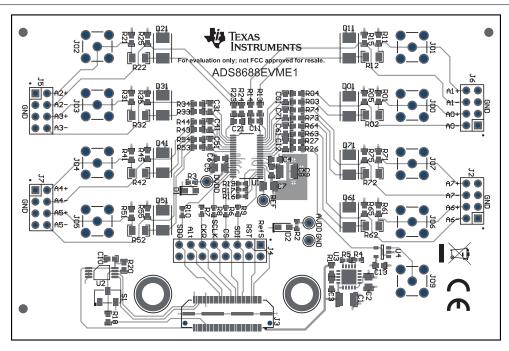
ADS8688EVM PCB: Top Layer (L1)
